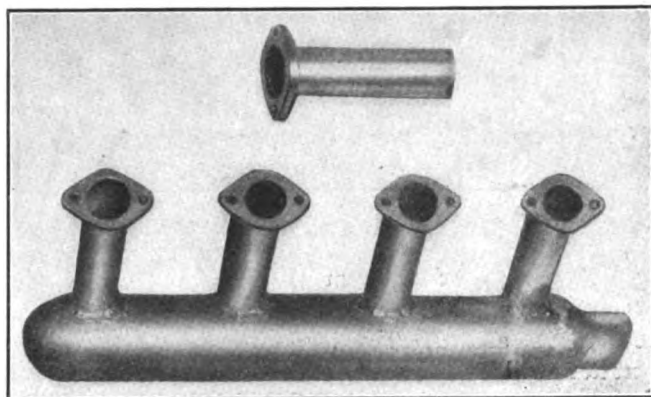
FINISHED WELDED AND BRAZED MUFFLER
